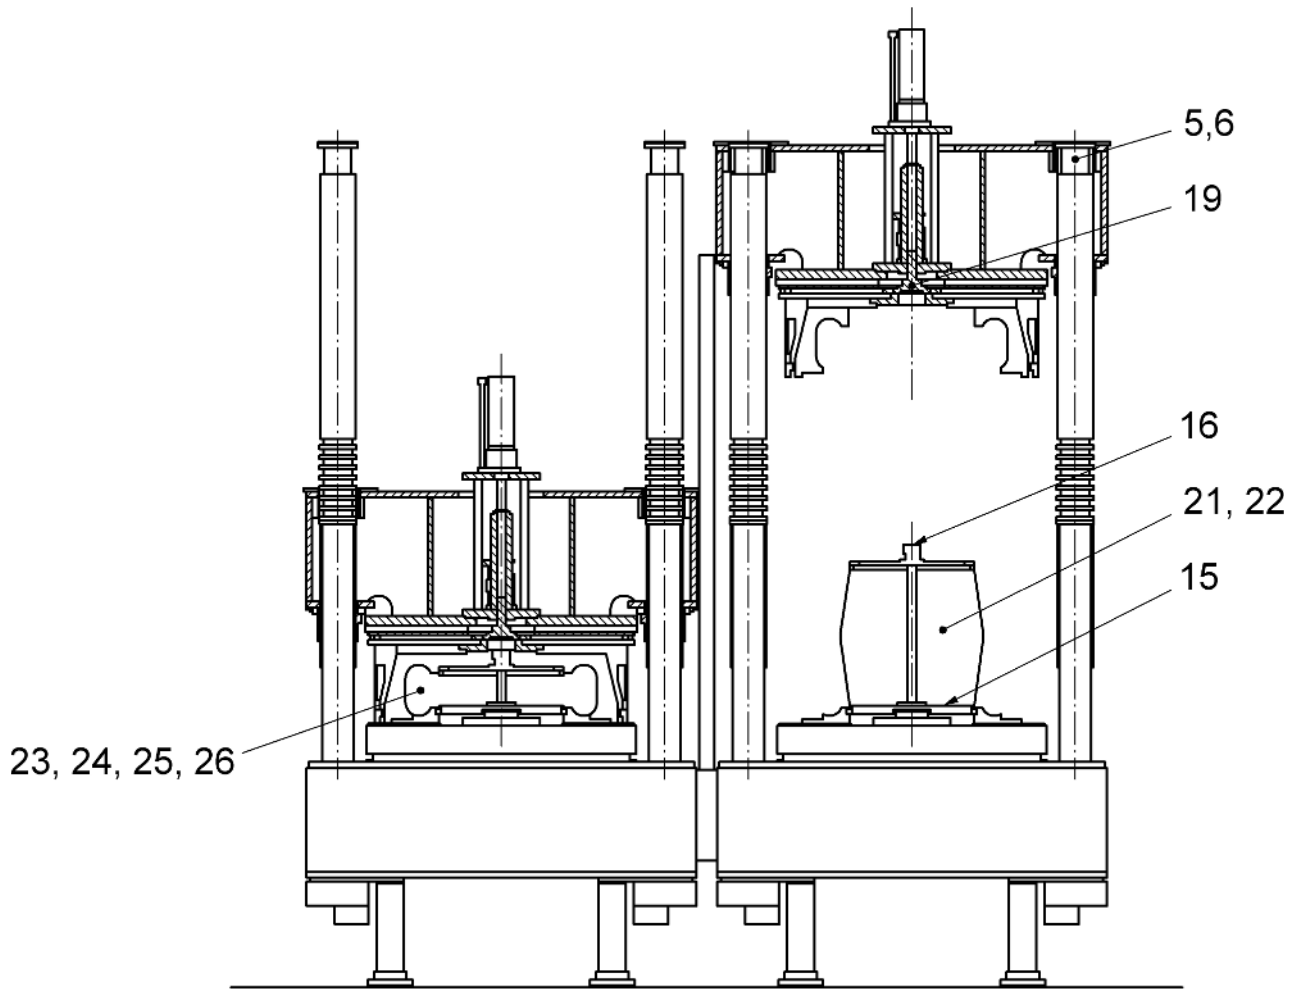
Location of hazards on tyre curing machines with automatic rear feeding and discharge (front view)
